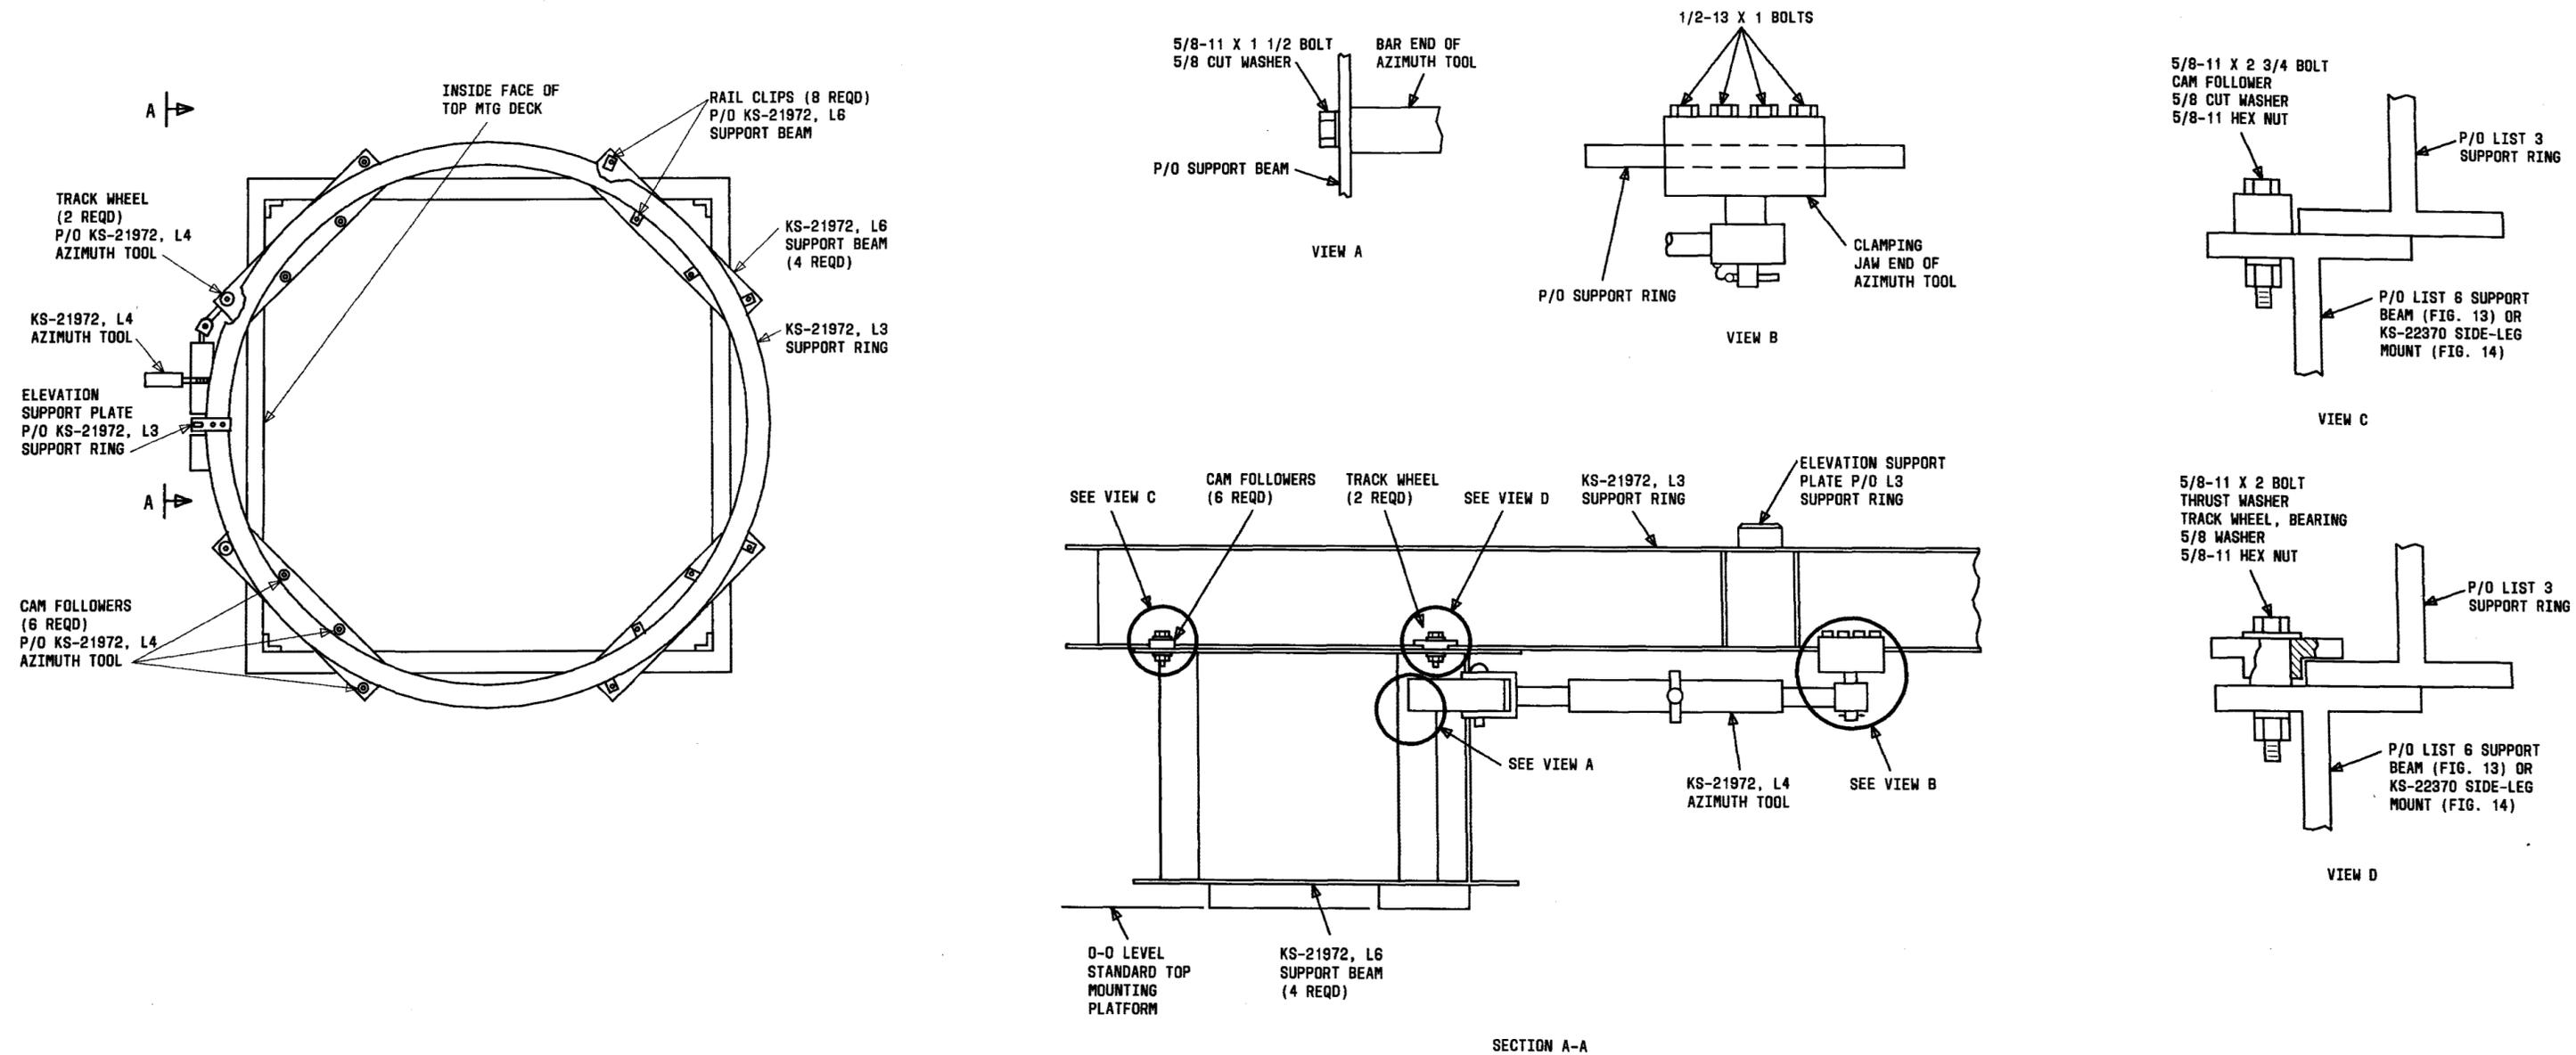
Assembly of the KS-21972, L4 Azimuth Tool to the L3 Support Ring and L6 Support Beam
